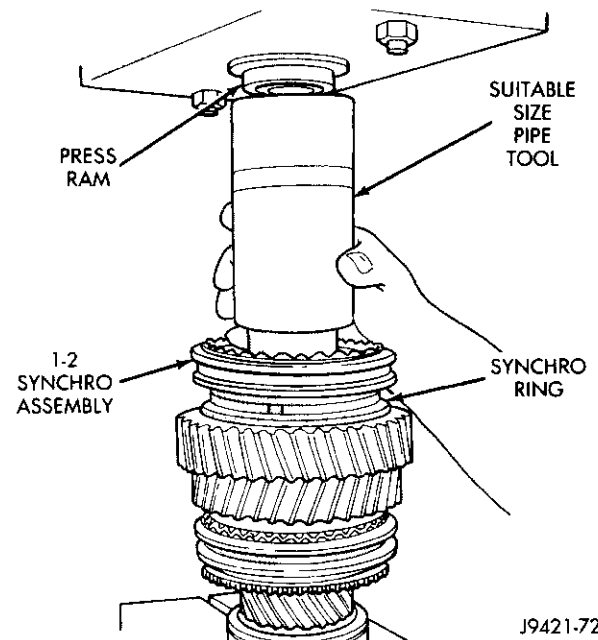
Pressing 1-2 Synchro Assembly Onto Output Shaft
